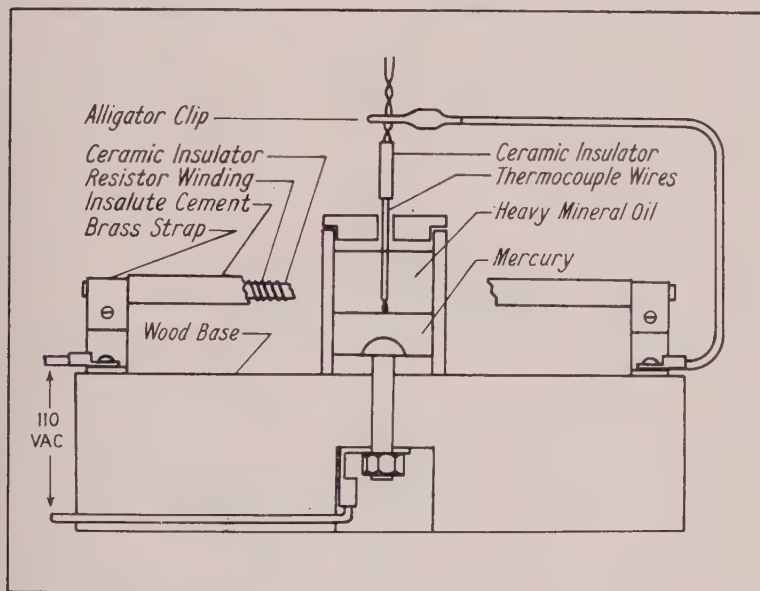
Thermocouple arc-welding device. A cup containing mercury covered with oil forms one 110 volt A.C. terminal. The thermocouple wires form the other. On contact, the two wires are fused to form a small sphere.
